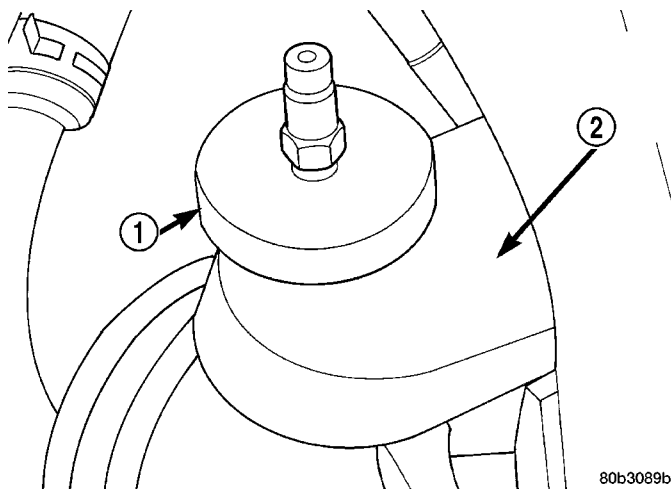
Pressure Bleeding Adapter Mounted On Fluid Reservoir
